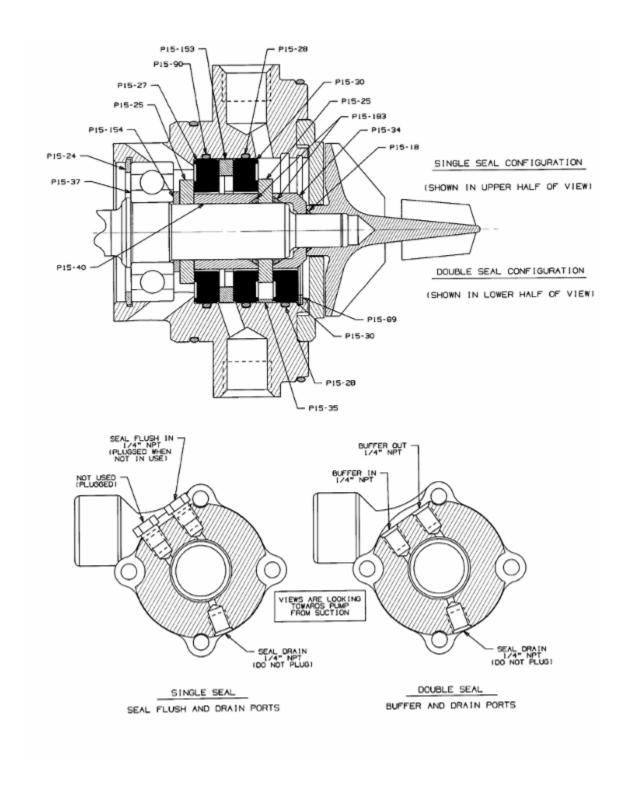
SINGLE AND DOUBLE SEAL INTERNAL CONFIGURATION CROSS-SECTION
